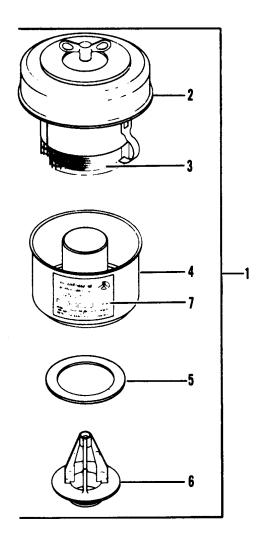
Air compressor assembly (sheet 2 of 3)
